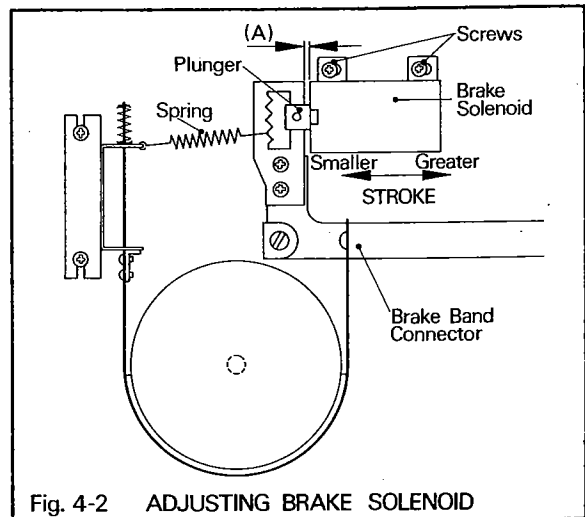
ADJUSTING BRAKE SOLENOID
